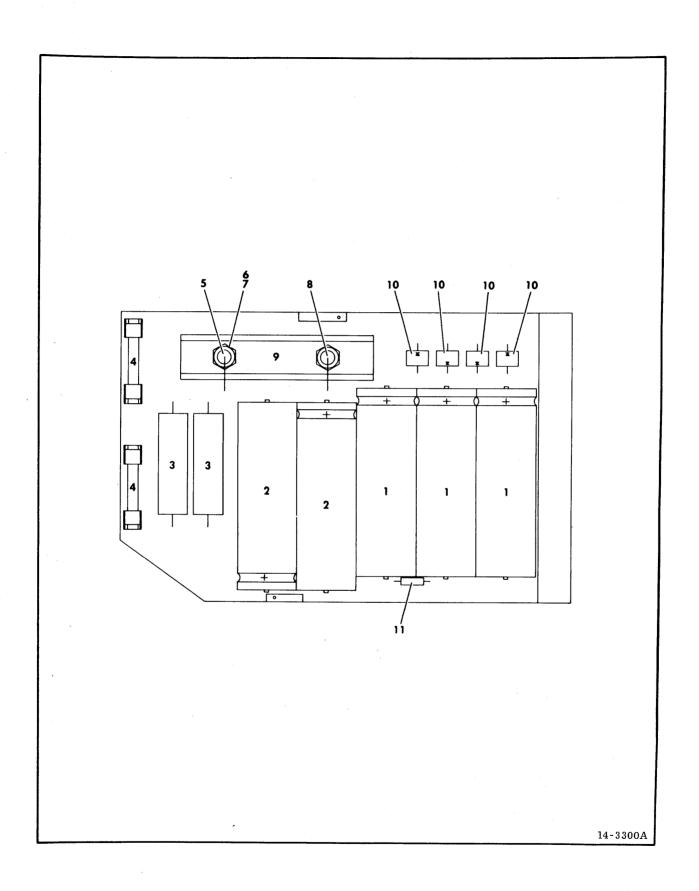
Component Assembly, Type SKV Used on 3 Card Power Supply Only
